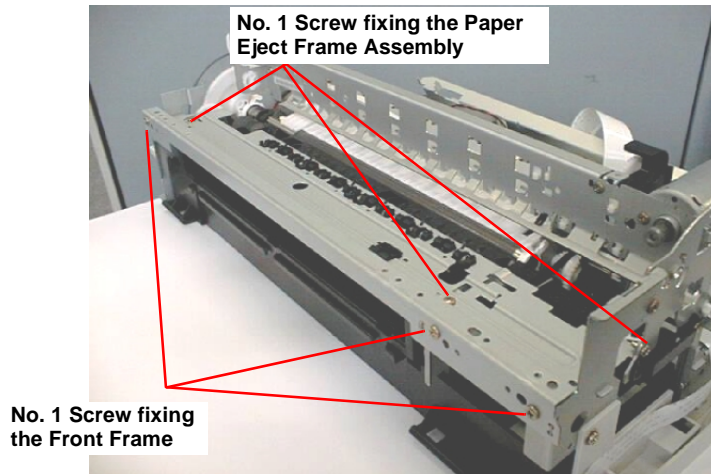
Removing the Front Frame & Paper Eject Frame
